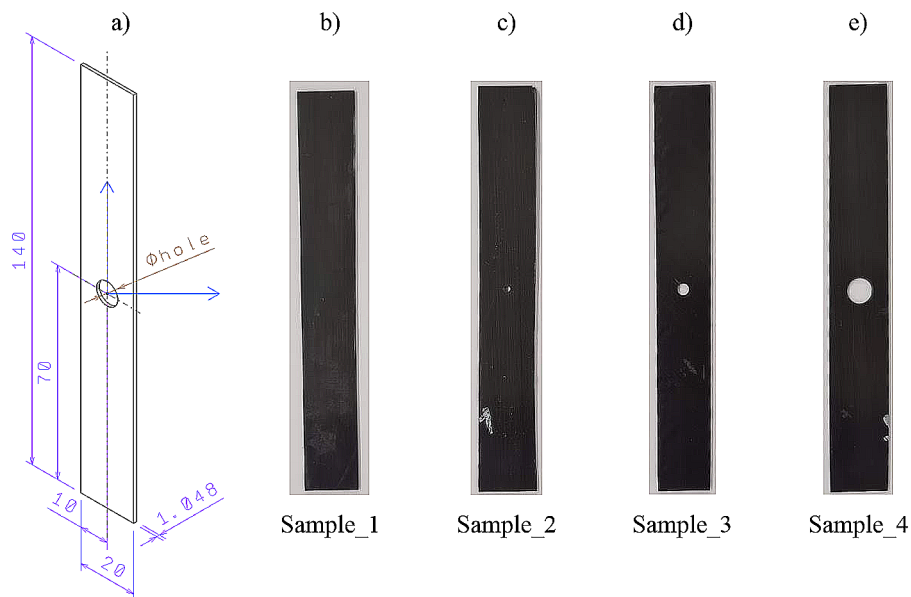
Subject of the study: (a) CAD model with dimensions in mm, (b) plate, (c) plate - Ø2 mm hole, (d) plate - Ø4 mm hole, (e) plate - Ø8 mm hole
